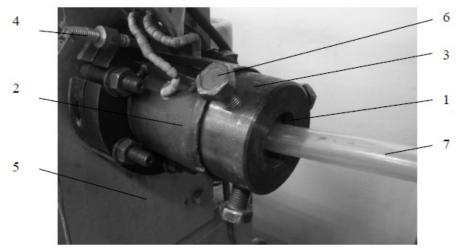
View of extruder head: 1 - body of the nozzle head, 2 - heater ring, 3 - head body, 4 - temperature sensor, 5 - fragment of the extruder plasticizing unit, 6 - adjustment screws nozzle body 7 - formed pipe Source: author's own work
